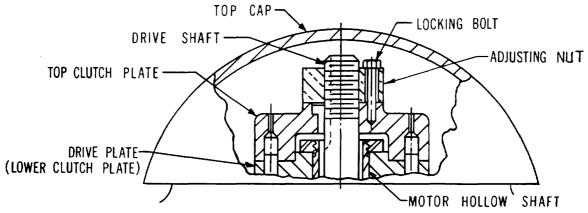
GENERAL ARRANGEMENT OF CLUTCH
